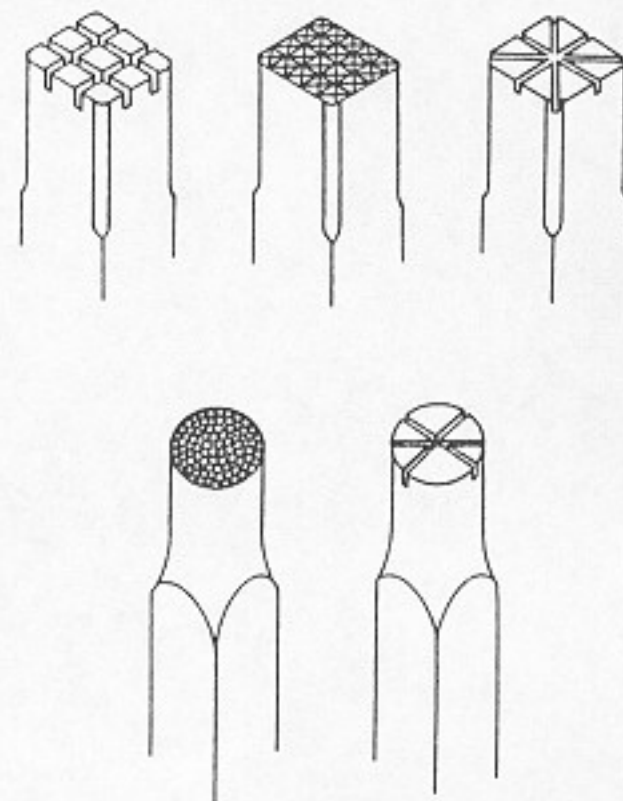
Matting tools are generally made from $\frac{1}{4}$ " to $\frac{3}{8}$ " square pieces of tool steel about $4\frac{1}{2}$ " long.
